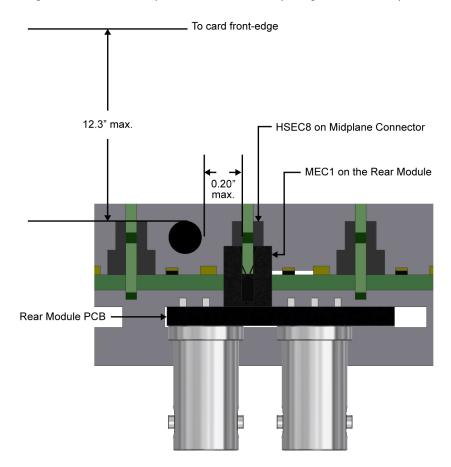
OGX-FR — Midplane to Rear Module Spacing (Top View)
